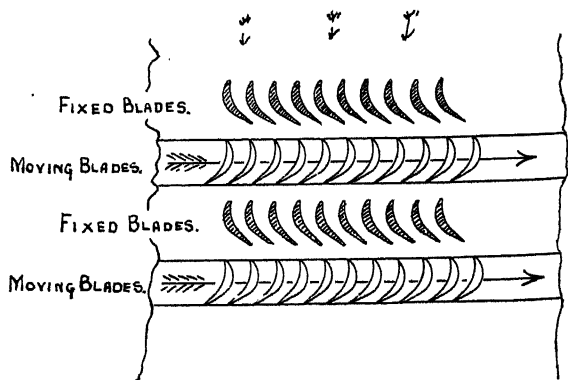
Section through blades in annular space between shaft and casing showing relative positions of fixed guide blades and moving blades. The three arrows at the top indicate the direction of motion of the entering steam.
